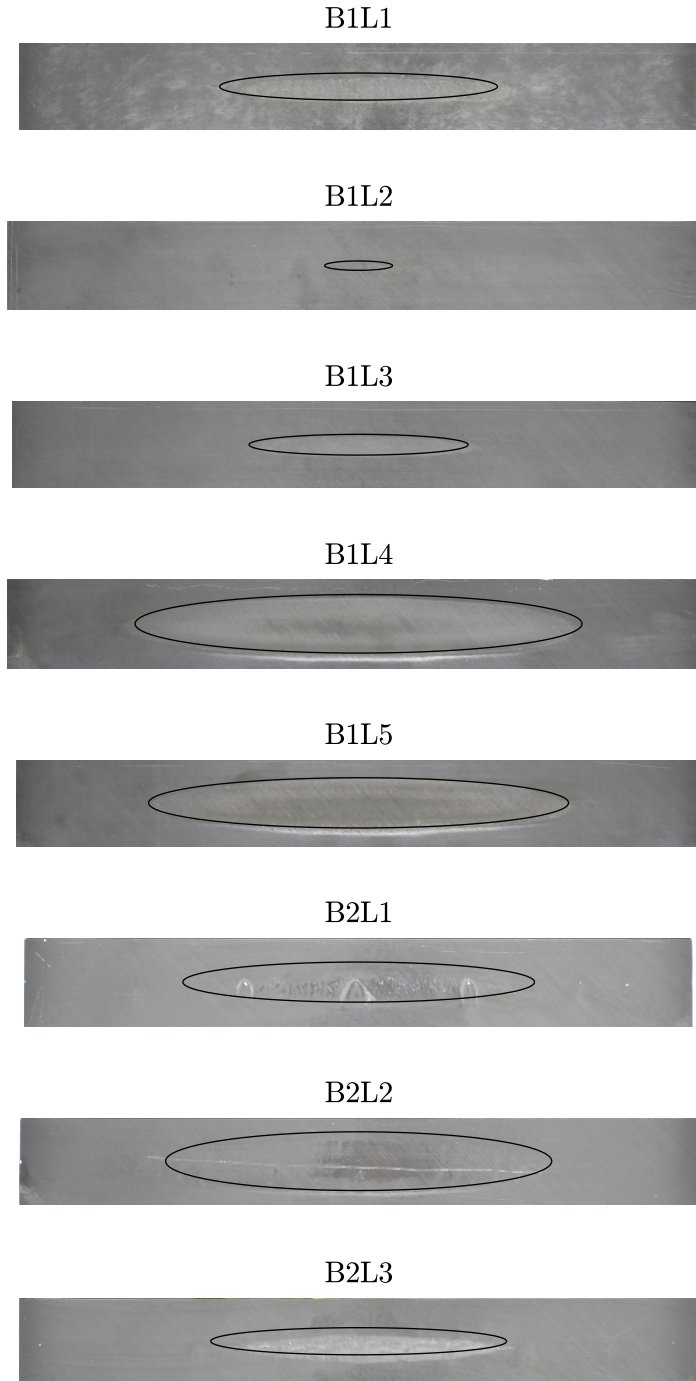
The elliptical surface defect at the back of the assembly overlap.
